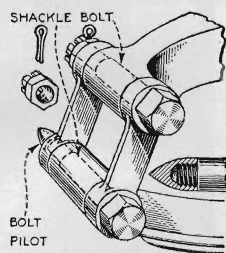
A pointed cap nut simplifies task of getting spring bushing and shackle holes together for the bolt
